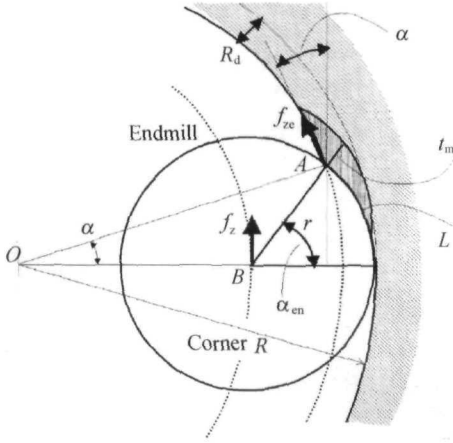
Engagement between the cutting tool and workpiece in a concave contour end-milling process. L —the cutting arc length; t_m —the maximum uncut chip thickness; α_{en} —the cutting-related angle; α —the angle formed by f_z and f_{zc} ; f_z —the feed per tooth at the tool center; f_{zc} —the feed per tooth at the tool tip; R_d —the radial depth of cut; r —the endmill radius; R —the contour radius.
